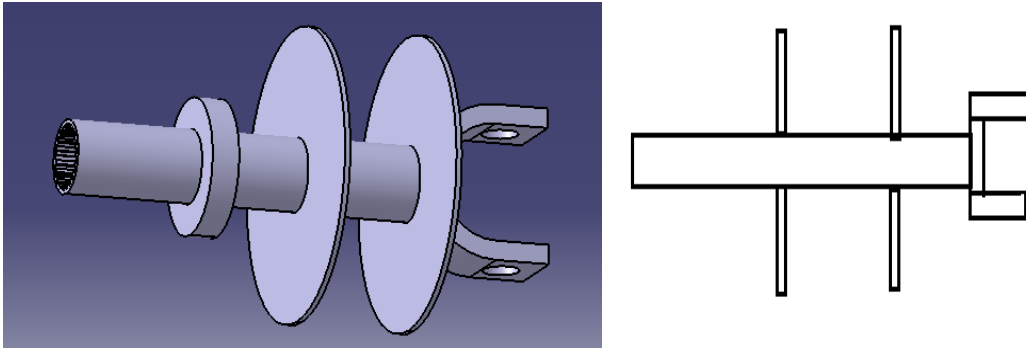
3D and 2D view of modified female slip joint of propeller shaft
